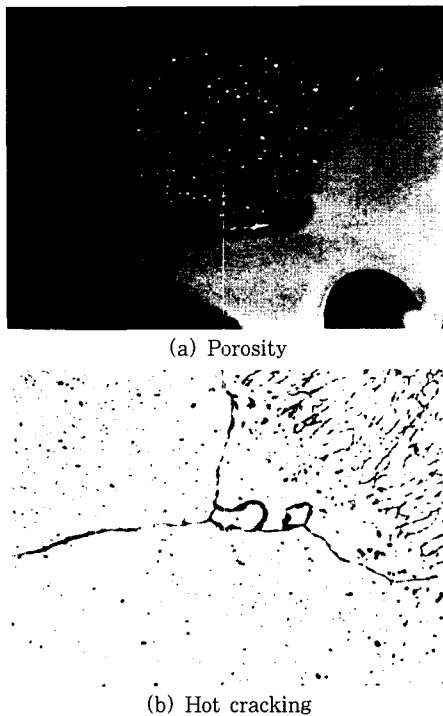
Weld defects of aluminum extrusion profiles A6005A
